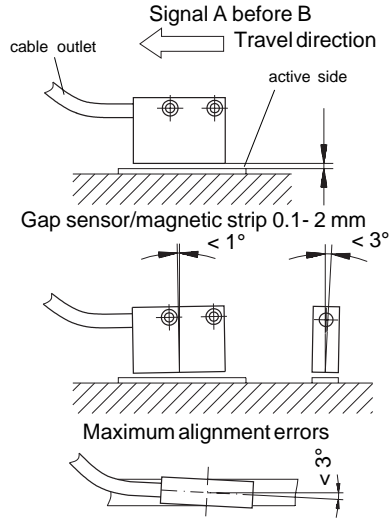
Definition of the counting direction with magnetic strip MB200 and assemblage of sensor / magnetic strip, gap measures, tolerances
